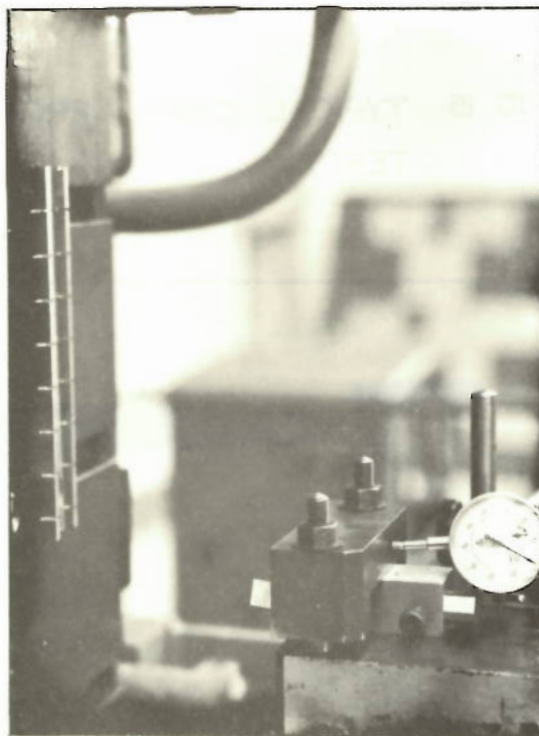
EXPERIMENTAL SET-UP ON BROACHING MACHINE
